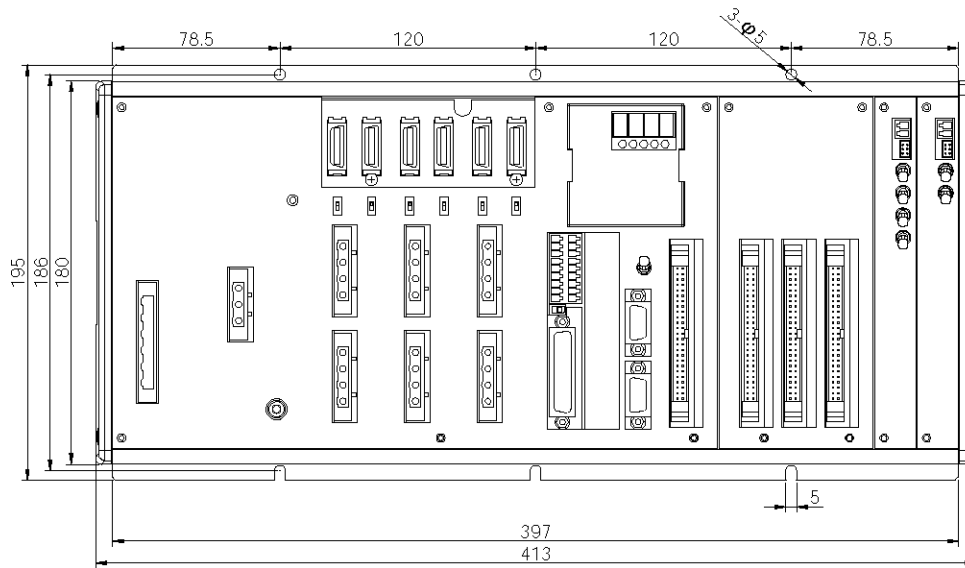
P Type 6 axis Controller with Expansion I / O Board + Absolute Brake Unit
